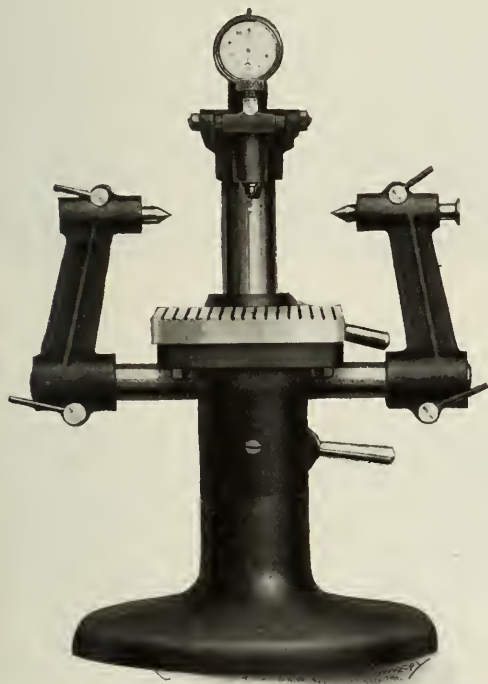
No. 60 Universal Amplifying Gage made by North Side Tool Works
